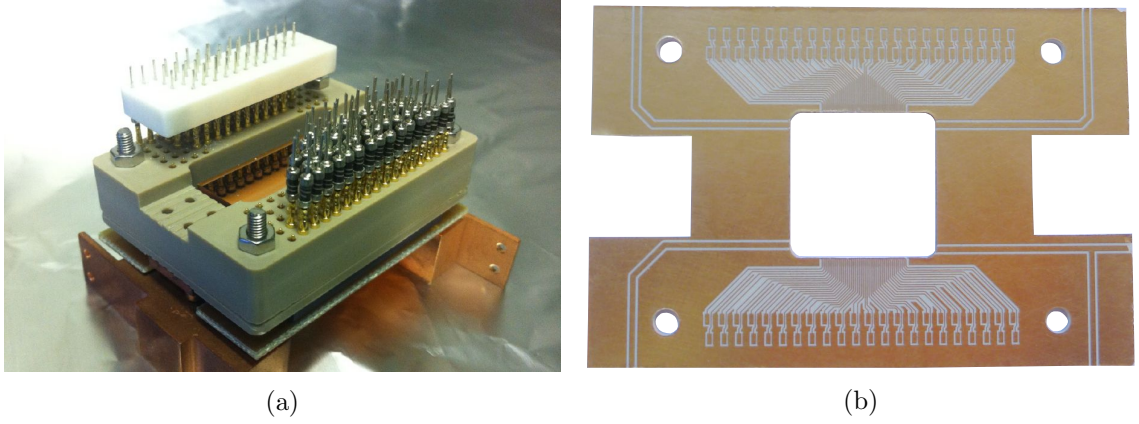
(a) Resistors with crimped gold receptacles inserted into the PEEK block. A Macor spacer is also used to ensure the resistors are separated to prevent electrical shorts. (b) The in-vacuum filter PCB which has been machined to fit the mounting structure.
